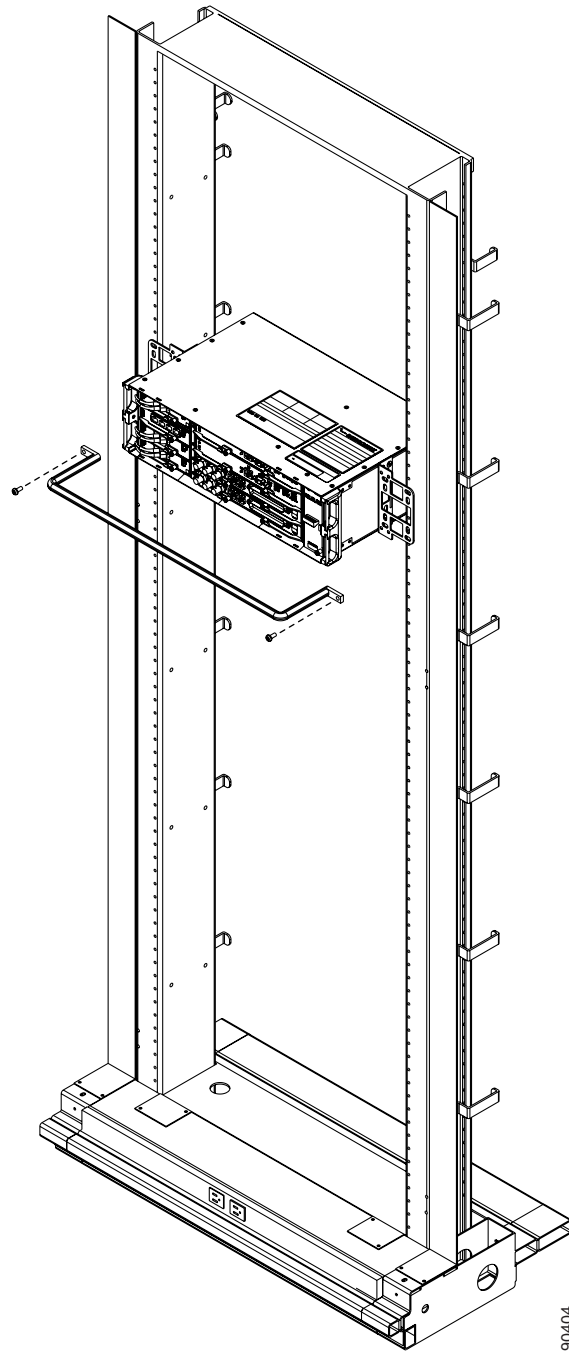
Managing Front Panel Cables with Locking Cable Guides
